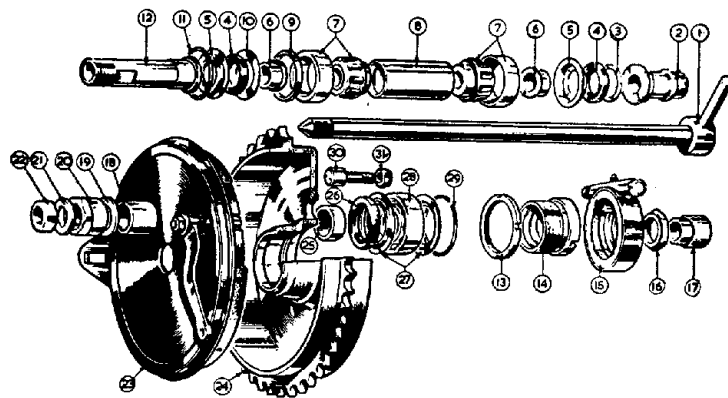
Rear Brake and Wheel Bearings, De-luxe Models
